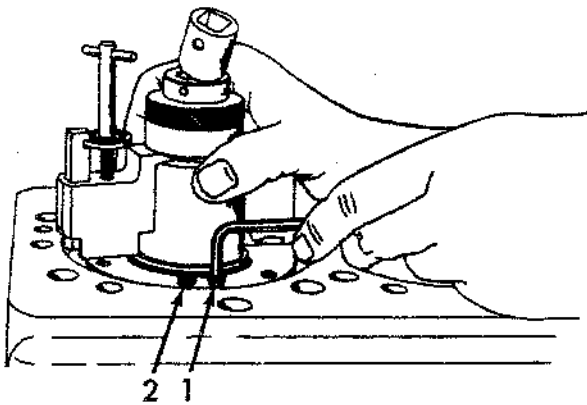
Securing Cylinder Sleeve Reseating Tool in Cylinder Block (T-51393)
